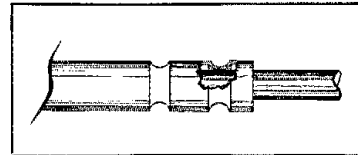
Use the new roller to groove the larger tube of a slip joint. This reduces the tube's inner diameter slightly to provide a snug fit with a smaller tube.
